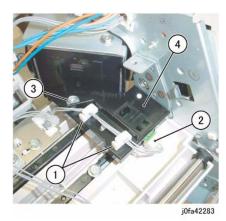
Removing the Rear Tamper Home Sensor Assembly
